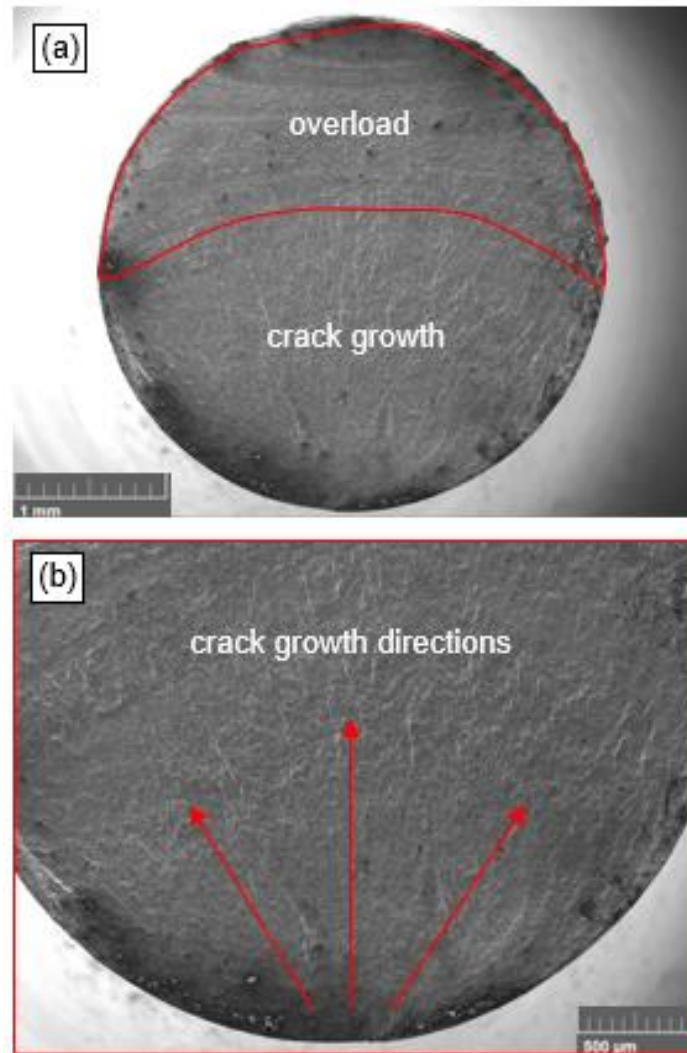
SE fracture surface images of a wrought Inconel 718 specimen tested at $\sigma_a = 500$ MPa with a corresponding fatigue life of $2N_f = 2.54 \times 10^7$ reversals. The overall fracture surface with a single crack initiation site is presented in (a). The magnified image in (b) shows the direction of crack growth from the specimen surface.
